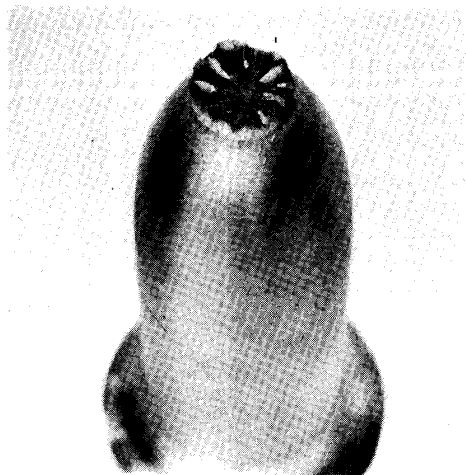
Light fractograph of SM50: fracture surface of Bridgman-type specimen. It shows typical radial fracture.
